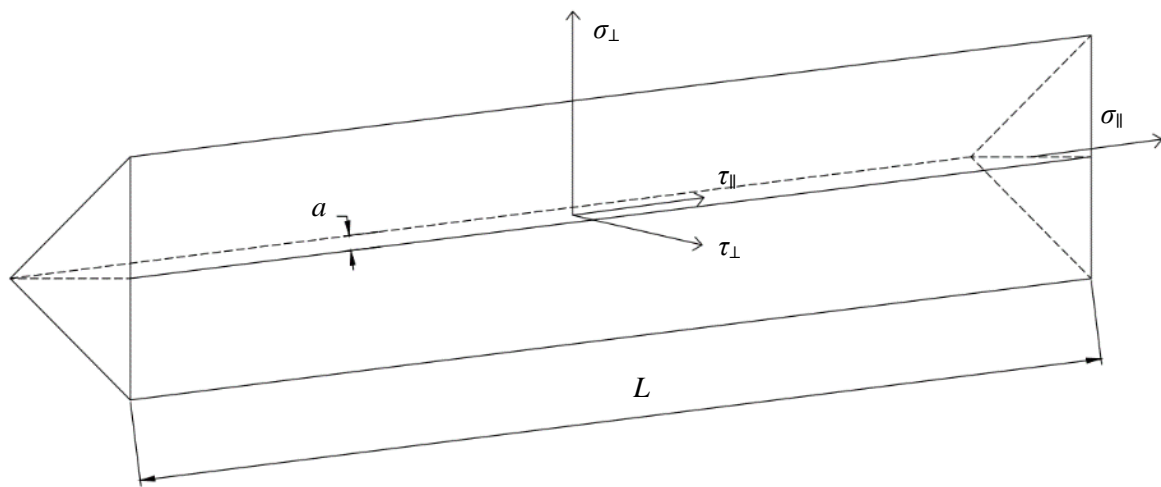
Stresses on the throat section of fillet weld [2].
